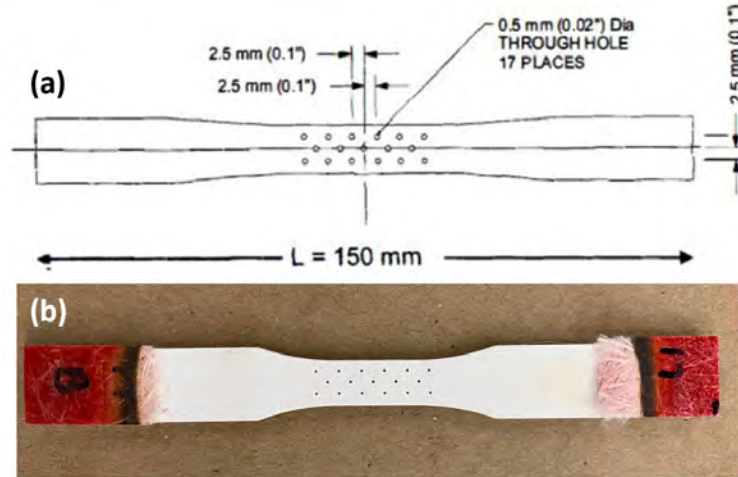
Nextel™ 720/A, fatigue testing specimens with an array of 17 holes: (a) Drawing [6], (b) Test Specimen
